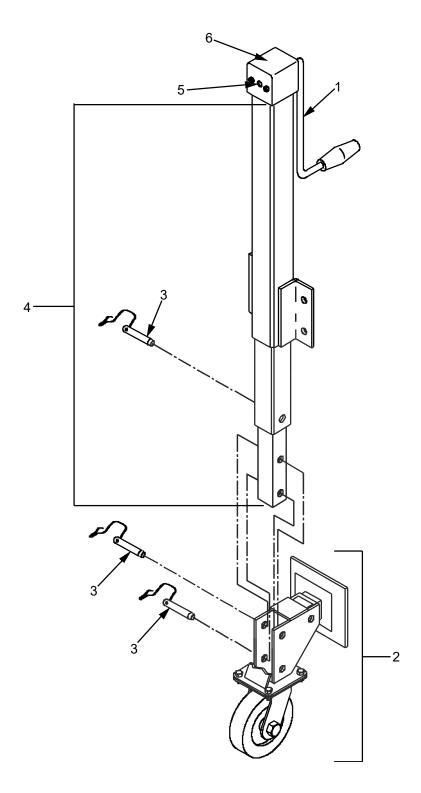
Chassis - Tongue Jack Assembly Details, PCHA0175G, PCHA0175T.
